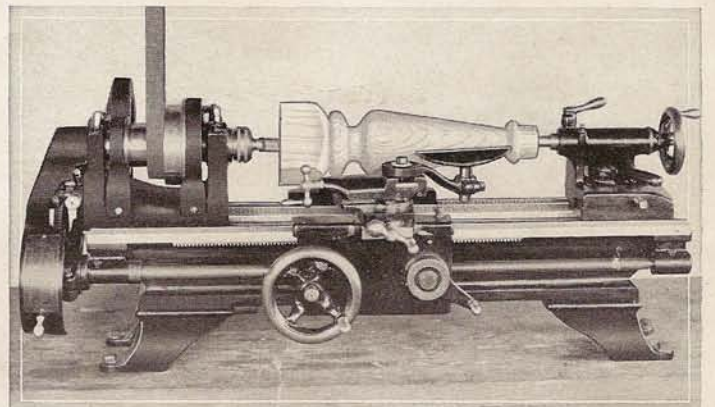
The No. 22 Junior Lathe Equipped with Hand Rest, Spur Center and Cup Center for Wood Turning and Pattern Making
